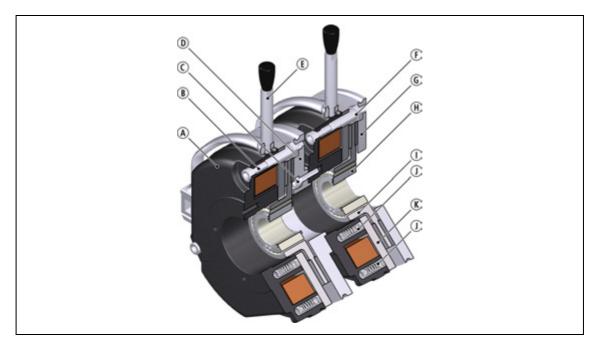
Design of the INTORQ BFK458 spring-applied brake: Basic module N, doubled design with intermediate flange
